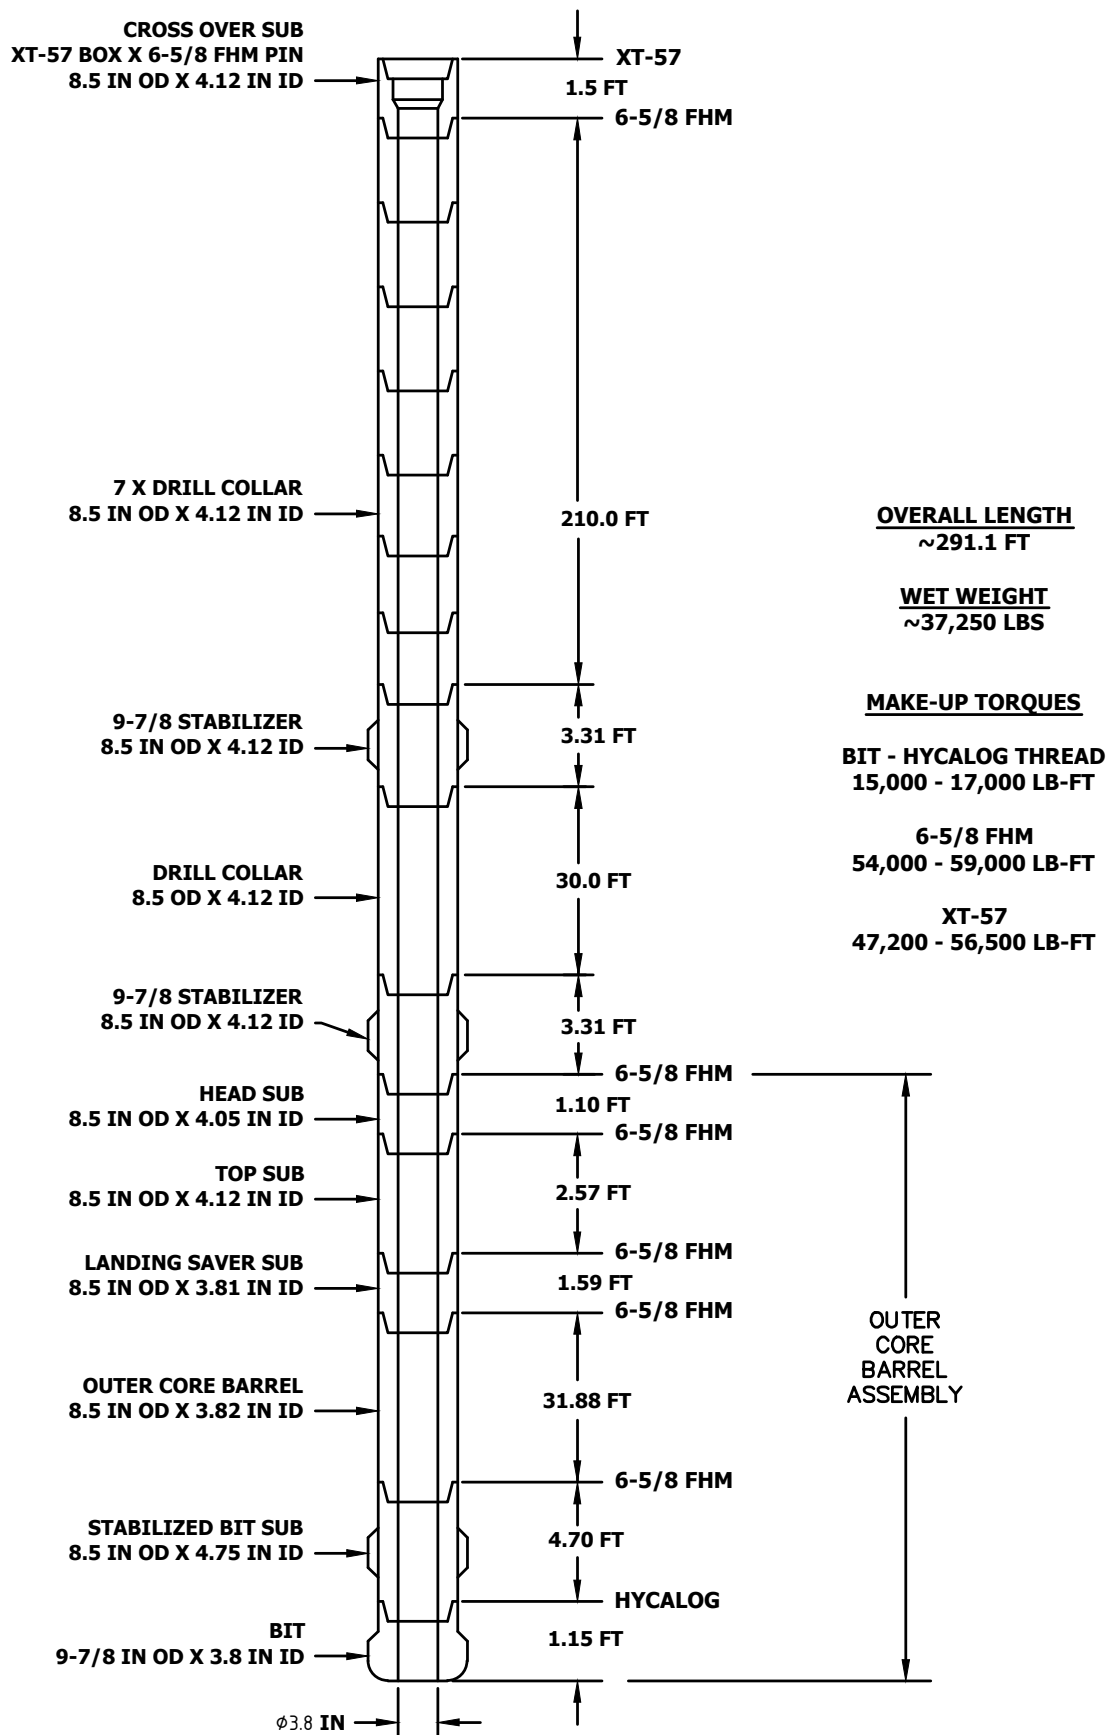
Hole H002 (0-8,748 ft RKB) bottom hole assembly (BHA) in the pressure coring tool with ball valve (PCTB) Face Bit configuration (PCTB-FB) with seven drill collars above the first stabilizer. Box and Pin specifications include XT-57, Full-Hole Modified (FHM), and HYCALOG. Sub assembly (SUB), inch (IN), pounds (LBS), feet (FT), foot-pounds (LB-FT), inner diameter (ID), outer diameter (OD).
